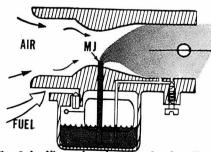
View of carburetor showing disc type throttle valve completely open for high speed operation.
